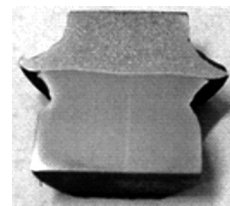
Macroscopic view of cross section of a sample welded by friction
